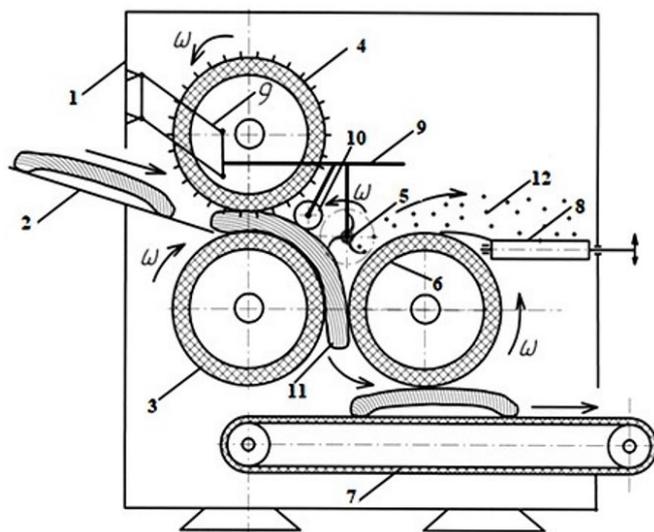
Equipment for cleaning cucurbit crops: 1 – frame, 2 – tray, 3 – support roll, 4 – needle roller, 5 – milling drum, 6 – clamping roll, 7 – conveyor of peeled slices, 8 – peel conveyor, 9 – holder, 10 – copying wheel, 11 – fruits, 12 – peel.
